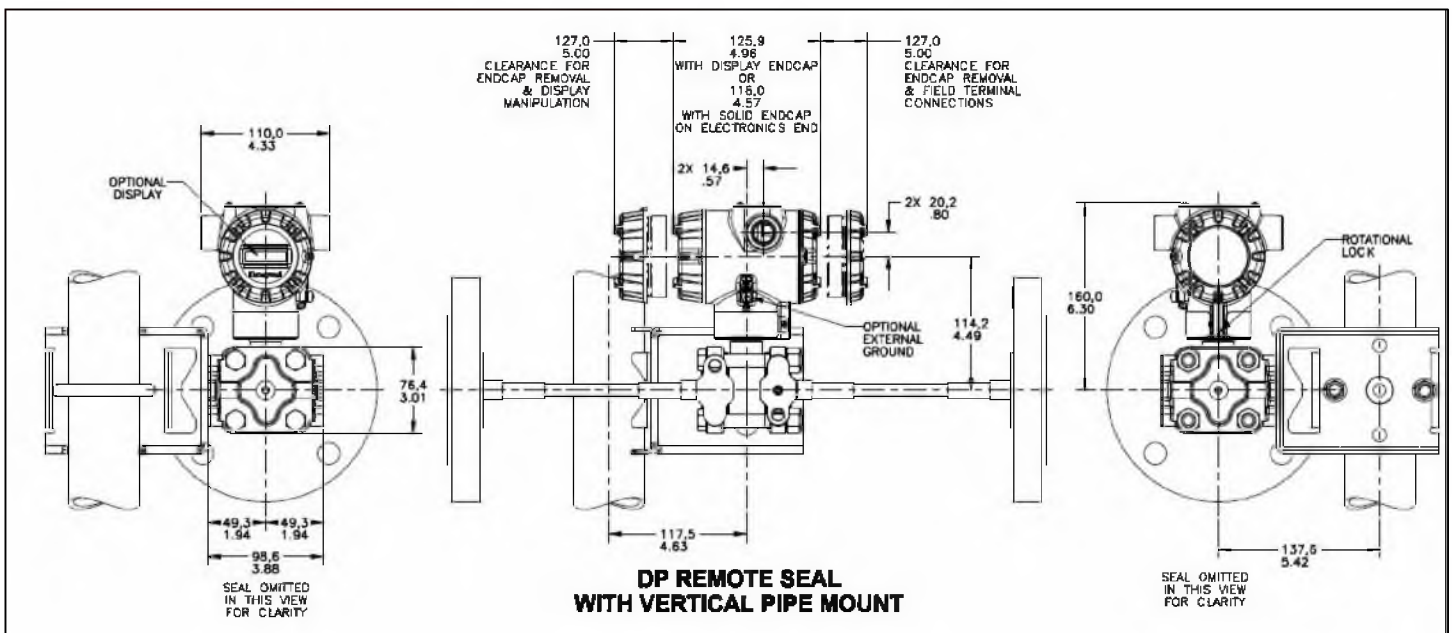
Approximate horizontal mounting dimensions for Remote Seal Transmitter
